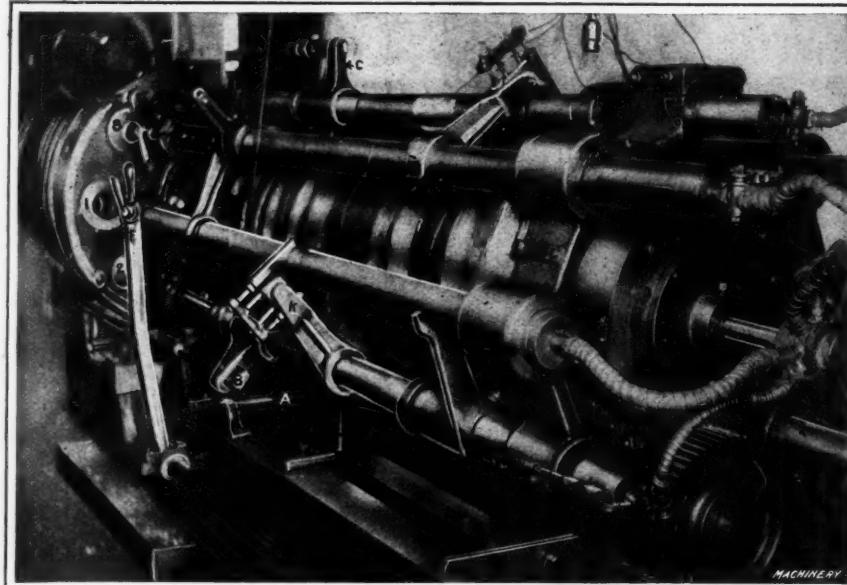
Semi-automatic Shell Making Machine for performing Operations on Interior of British 18-pounder High-explosive Shells
